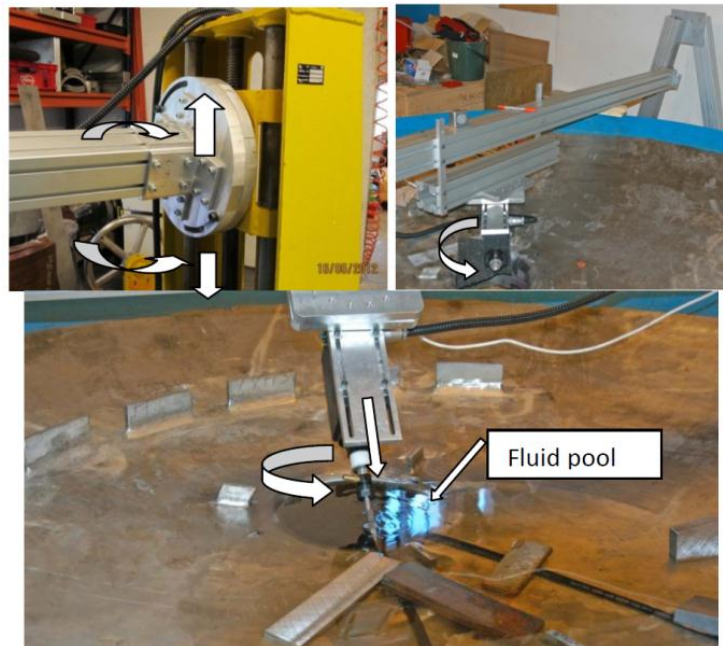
Assembly of the EDM machining system for YP-pressurizer bottom head flaw manufacturing. Adjustment movements are marked with arrows.
